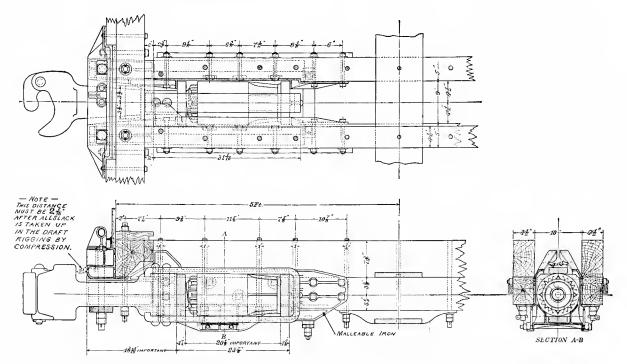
Westinghouse Friction Draft Gear for Freight Cars with Wooden Center Sills and Malleable Iron Draft Sills. Westinghouse Air Brake Company.
